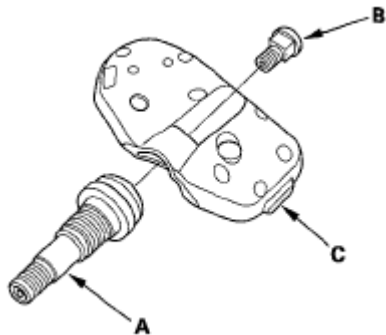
Identifying Valve Stem, Screw And Tire Pressure Sensor
